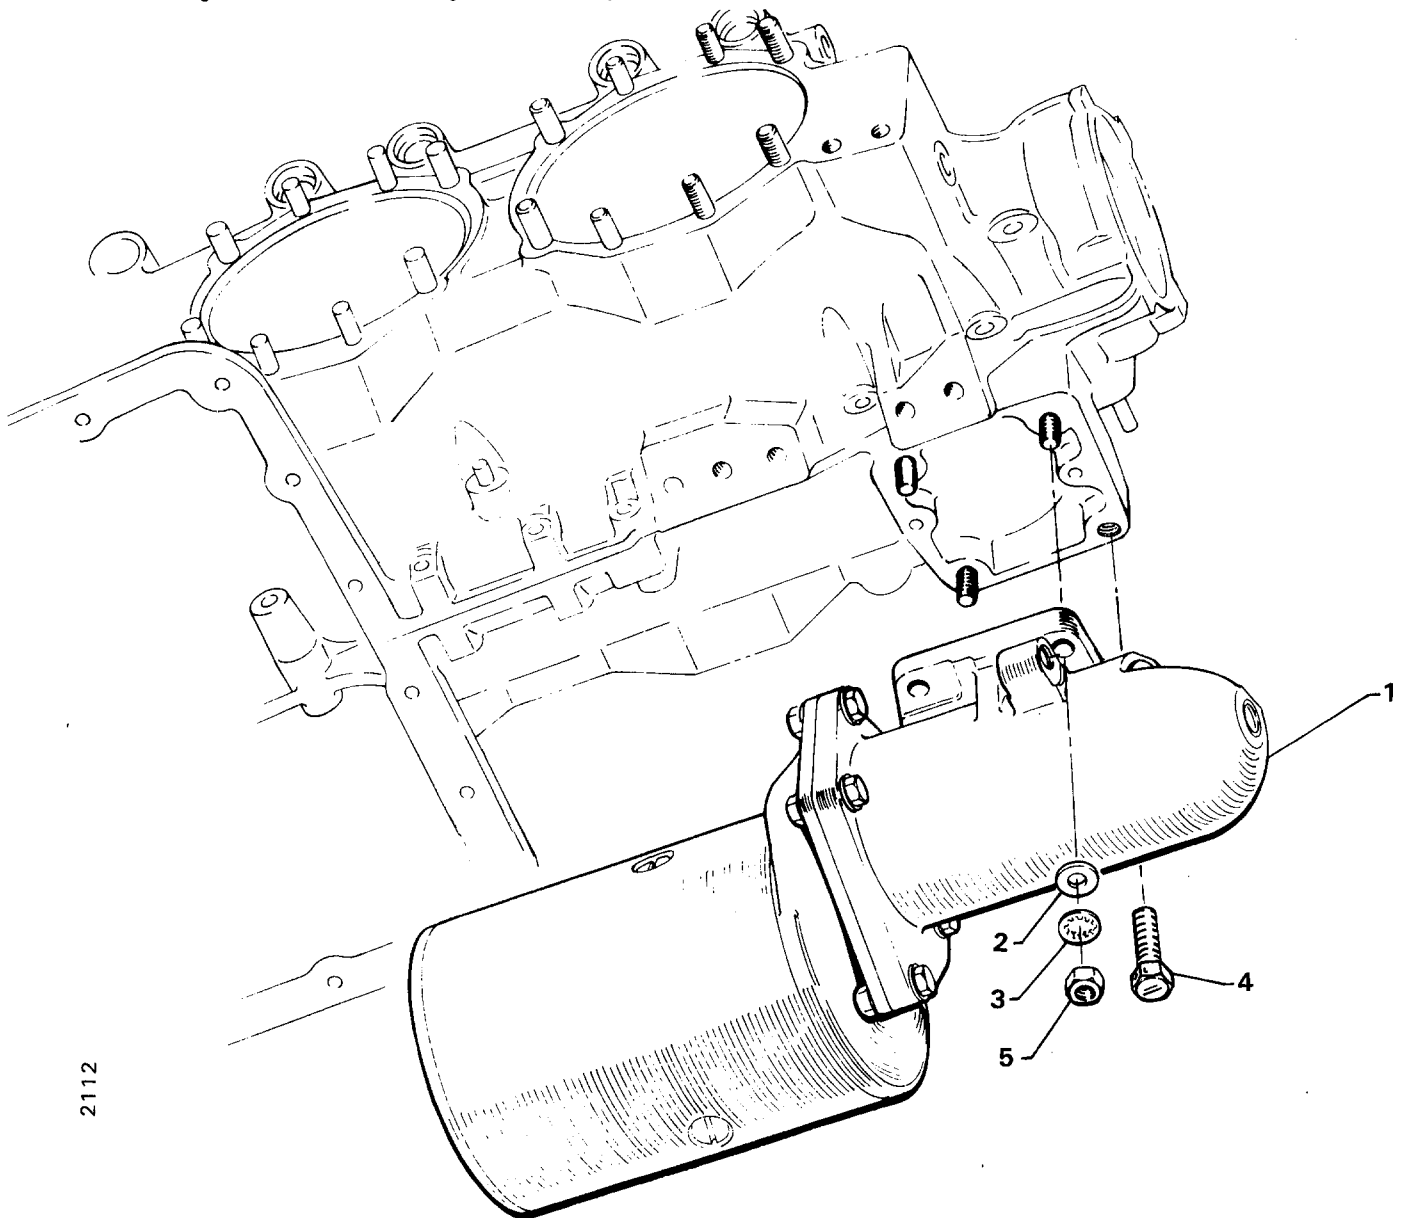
STARTER MOTOR AND ATTACHING PARTS
